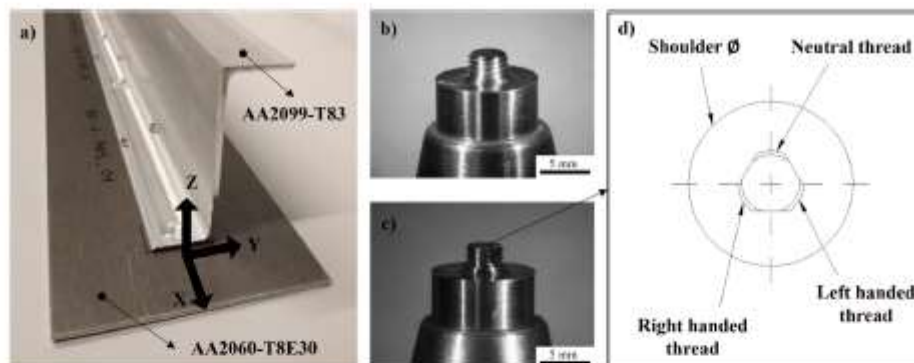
(a) Friction stir welding (FSW) lap joint between AA2099-T83 extrusion and AA2060-T8E30 sheet and FSW tools used to produce them; (b) conventional threaded tool; (c) 3 flats + mixed thread tool; and (d) sketch showing details of the top view of the 3 flats + mixed thread tool.
